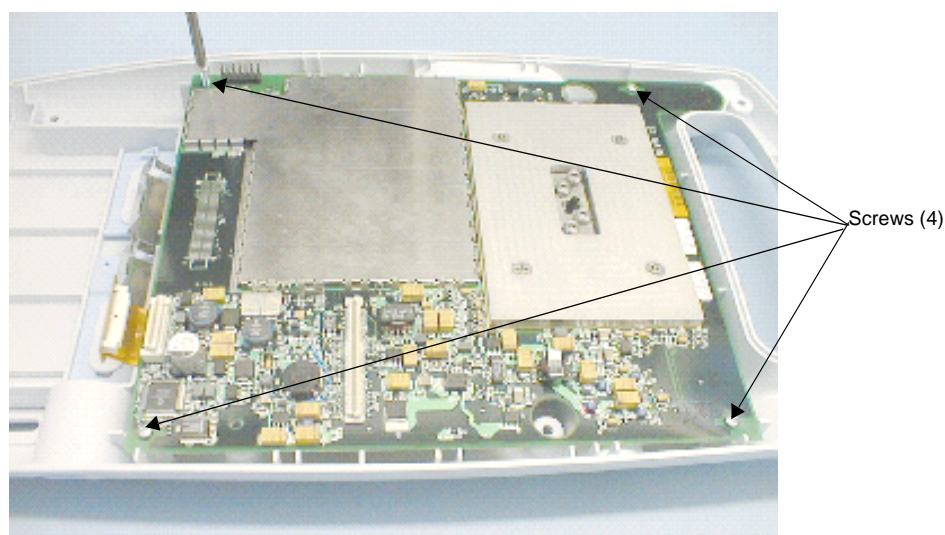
Securing the Main PCBA to the Bottom Housing
